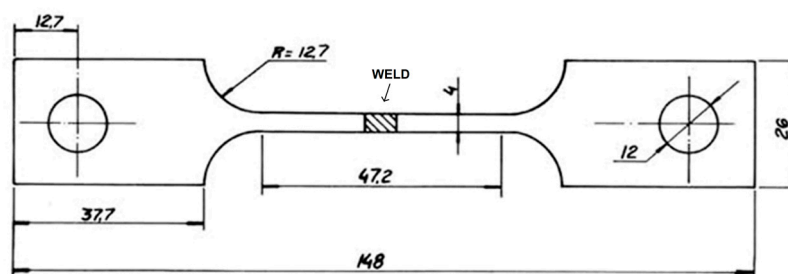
Design of the smooth tensile specimen used in stress corrosion cracking (SCC) tests (unit: mm).
